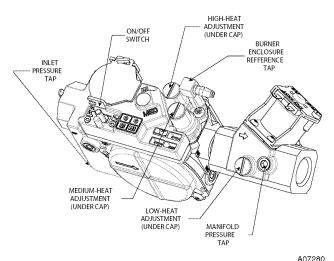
Redundant Automatic Gas Valve with Throttling Valve
